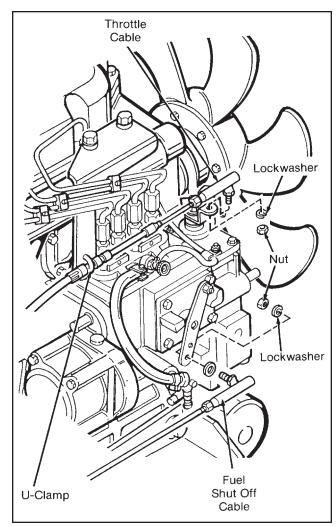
D-7. Fuel Shut-Off Solenoid and Throttle Cable Connections
